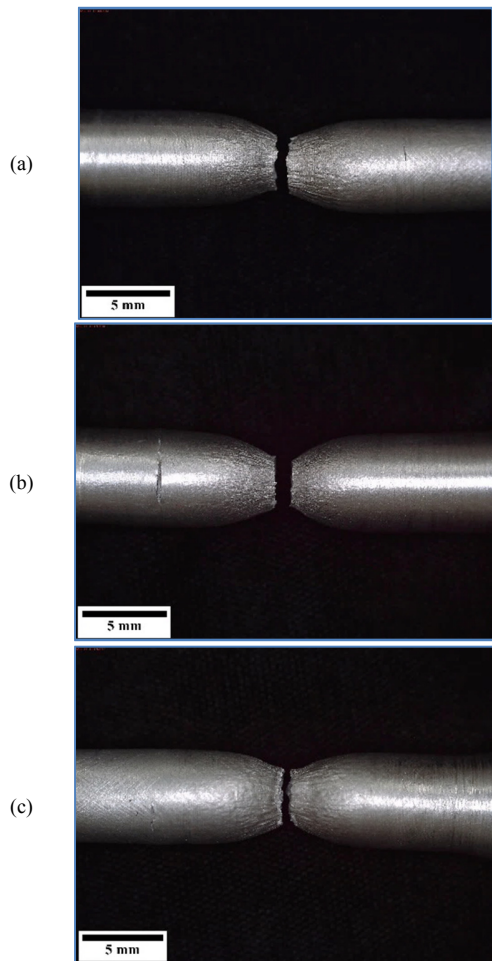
Fracture surfaces for t_f : (a) 4s, (b) 5s, (c) 6s
